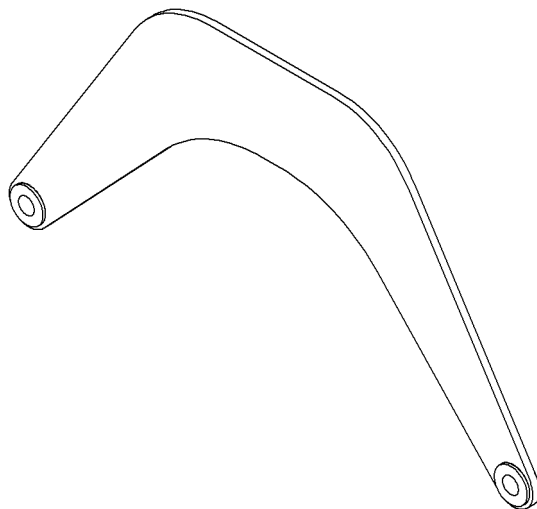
Mid-point suspension spacer bracket on main boom after the attached reducing piece
